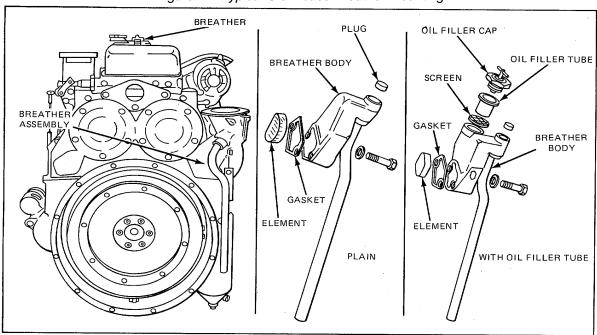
Crankcase Breather Mounting and Details (In-Line Engine)
